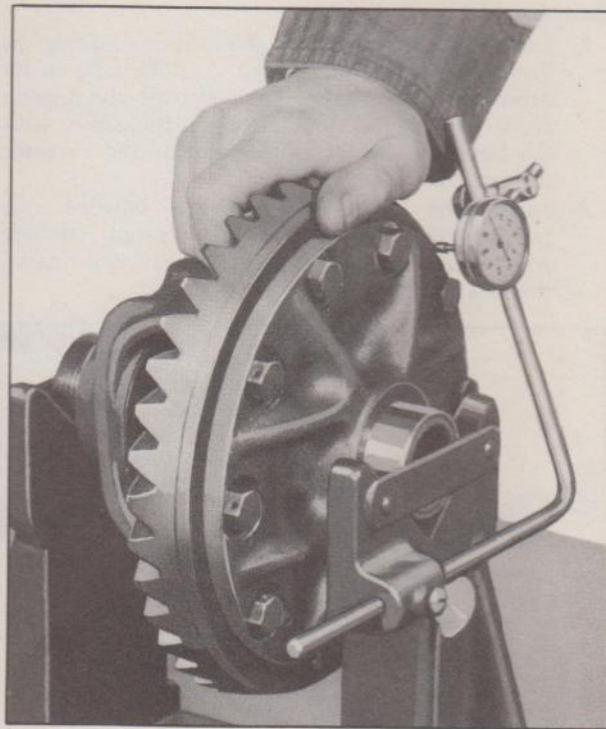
Checking Run-Out of Back Face of Ring Gear
